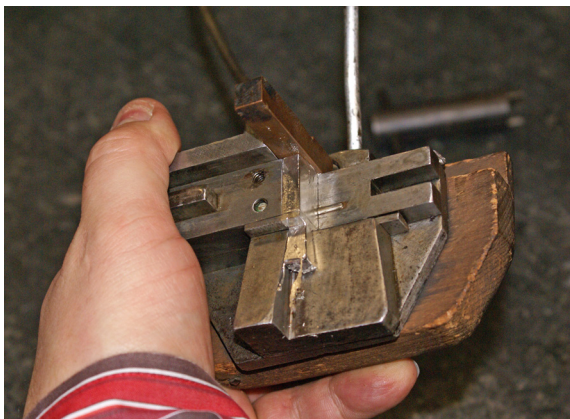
The two halves of the mould have to be separated to remove the cast letter.
